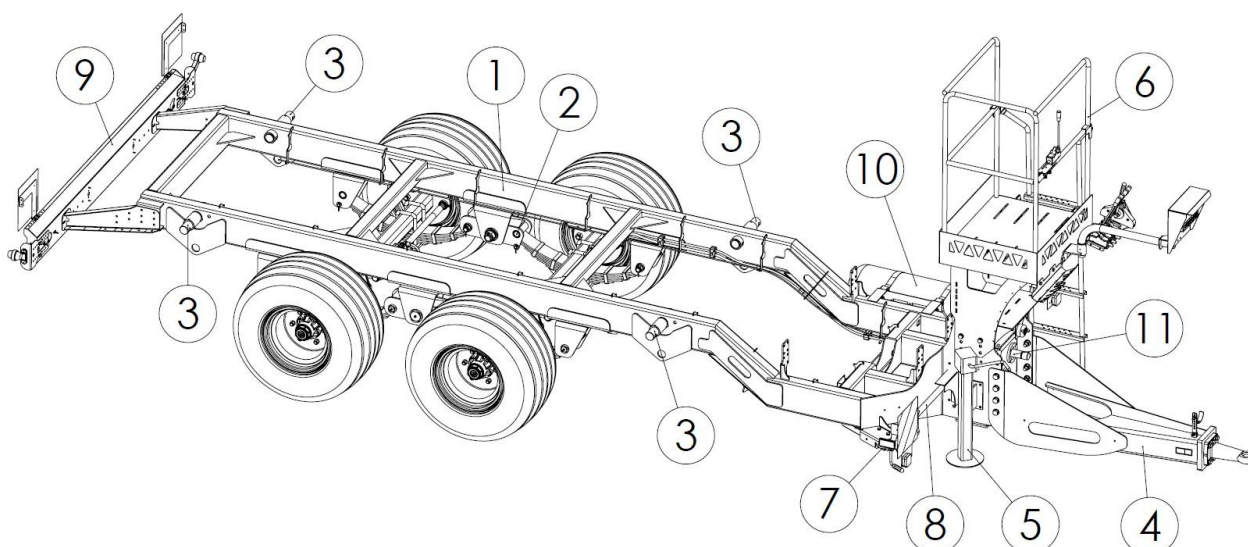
Chassis frame structure of a double-rotor wagon: 1 - frame, 2 - tandem suspension, 3 - balance sensor, 4 - drawbar, 5 - parking jack, 6 - platform, 7 - parking brake, 8 - front light frame, 9 - light bar, 10 - air tank, 11 - two-speed gear
